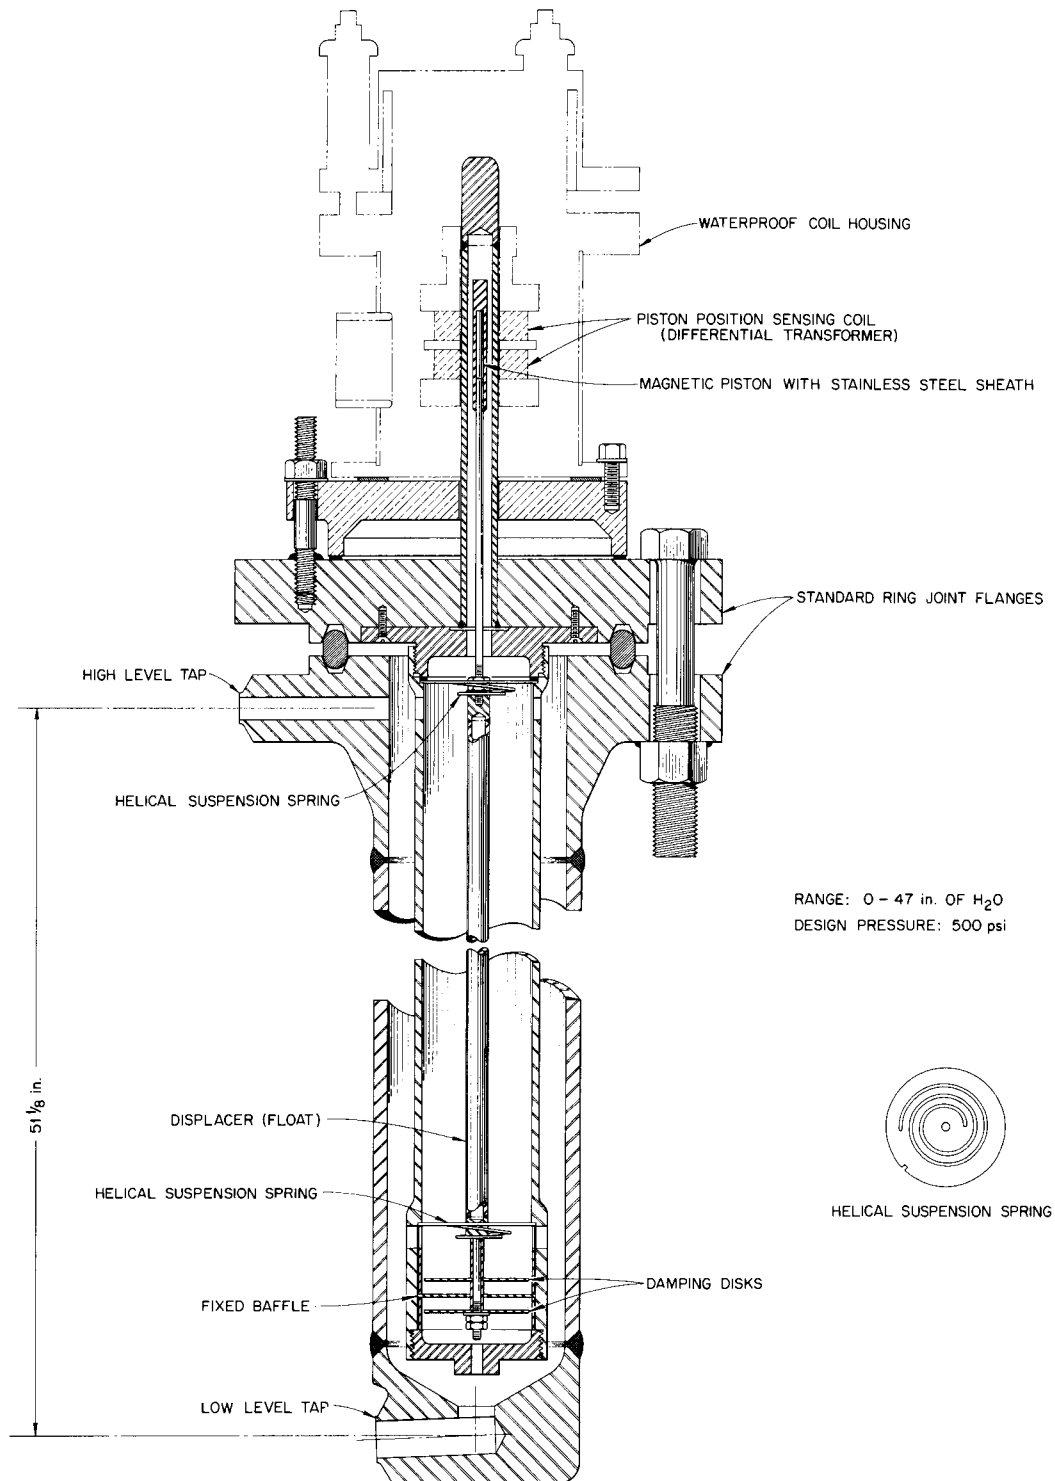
HRT Outer Storage Tank Liquid-Level Transmitter Assembly.
